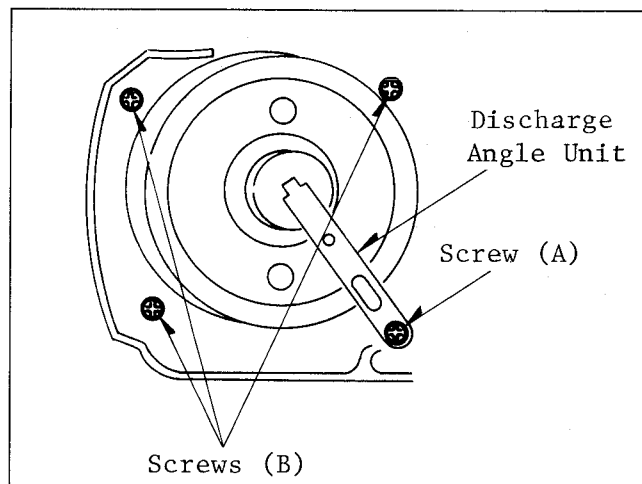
Replacement of D.D. Cylinder Unit -(1)
